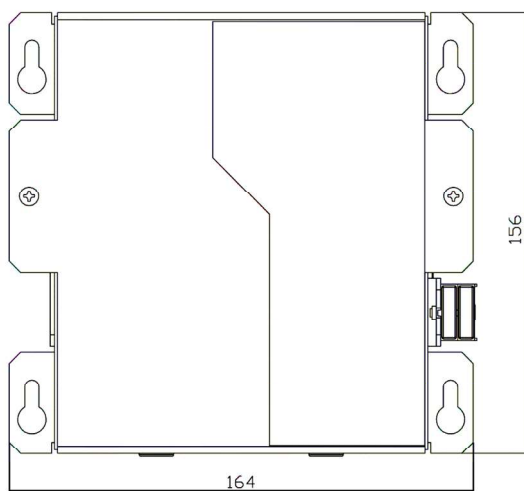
QUINT-BAT/24DC/7.2AH battery dimensional drawing
